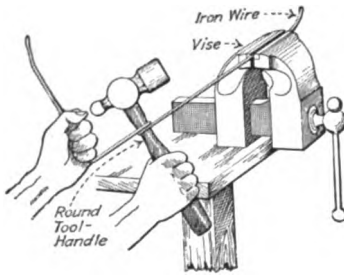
Taking kinks out of No. 22 gage annealed iron indicator wire.
